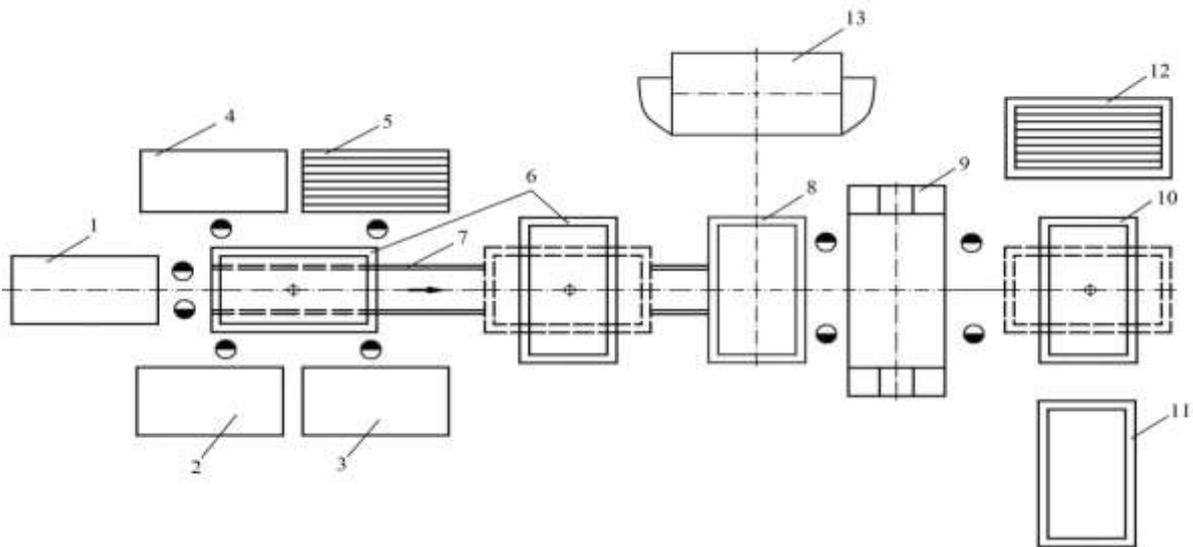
Line equipped with single daylight press and platform of supply for plating the chipboards with aluminum foil: 1-chipboard; 2-barrier film; 3-adhesive film; 4-aluminum foil; 5-bright finished sheets; 6-platform of packages format for press; 7-rolling track; 8-supply platform (storage) of the packages; 9-single daylight press; 10-rotating platform for downloading the press; 11-pallet for stacking PAL-Al; 12-lift truck for the stacking of the bright finished sheets; 13-cabin for cooled bright finished sheets.
